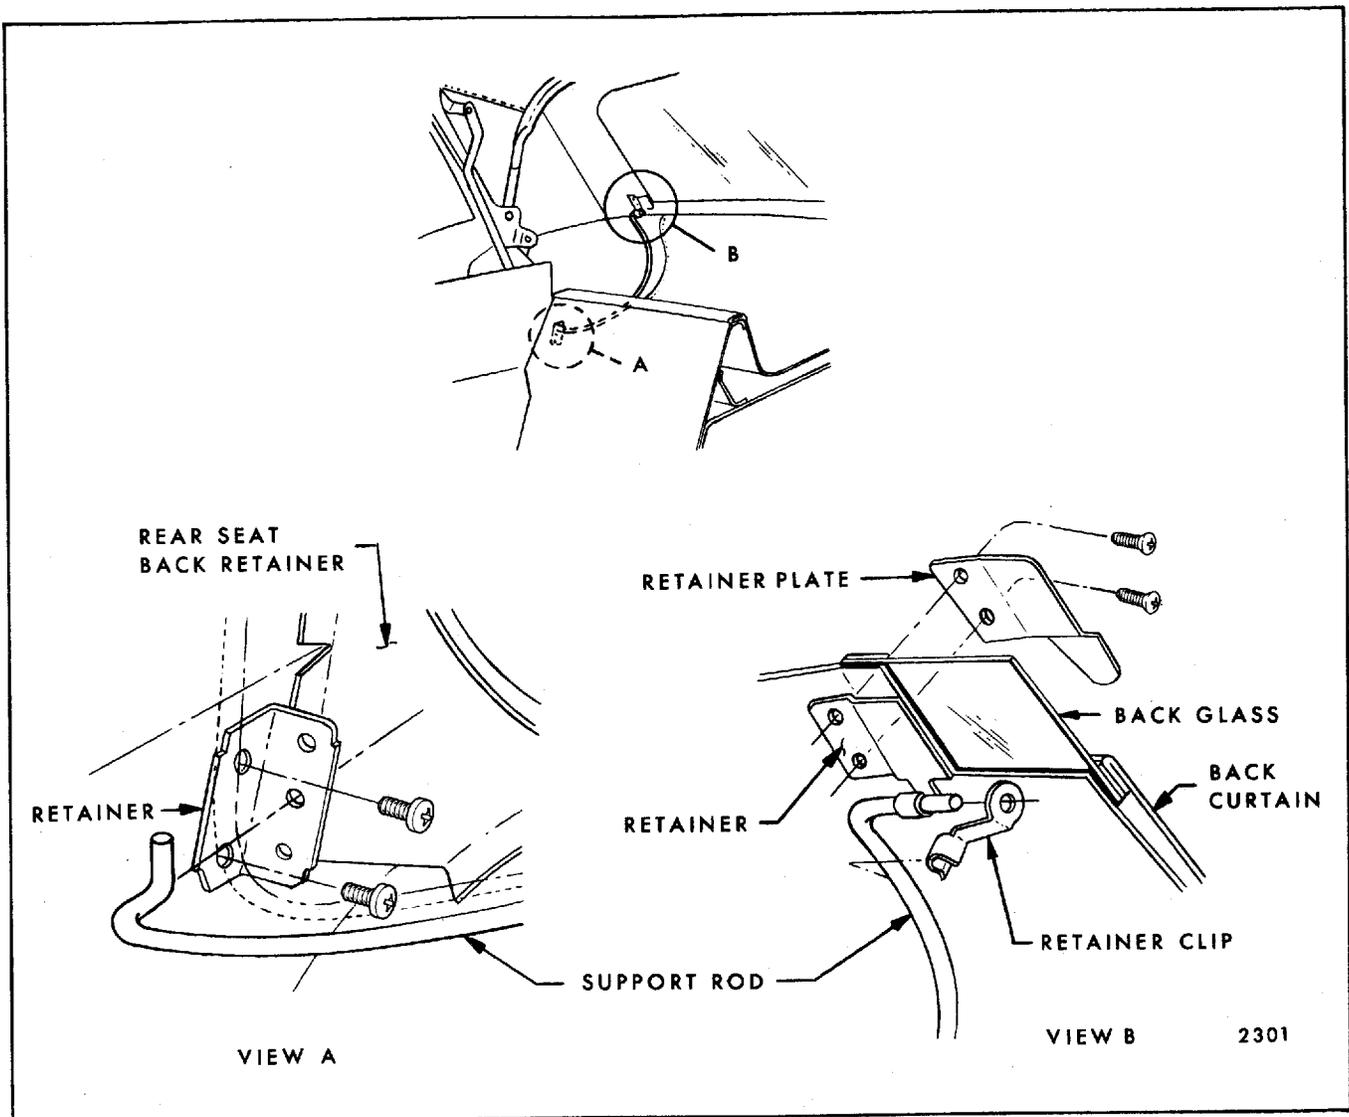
"B &amp; C" Body Back Glass Support Rod Attachments
